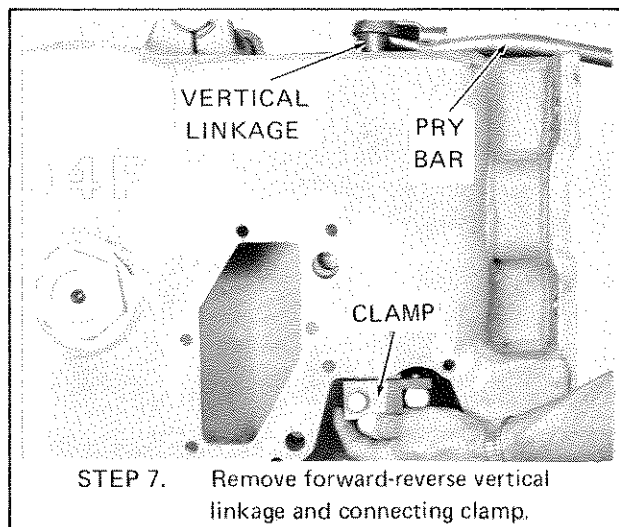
Removal And Disassembly of Brake And Bevel Gear Shaft Components (Sheet 2 of 4)
